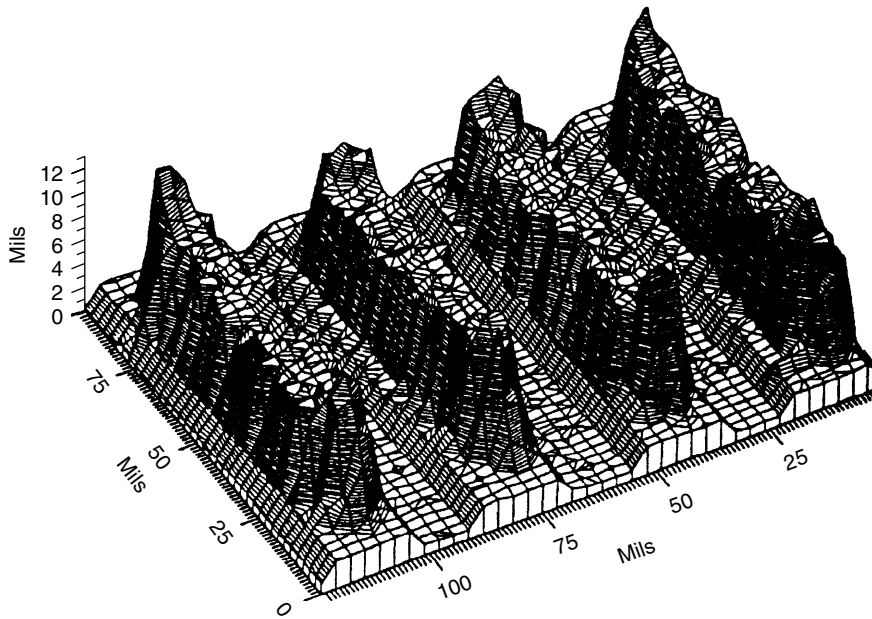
Process control for solder paste deposition with the use of laser-based sensor [29]
